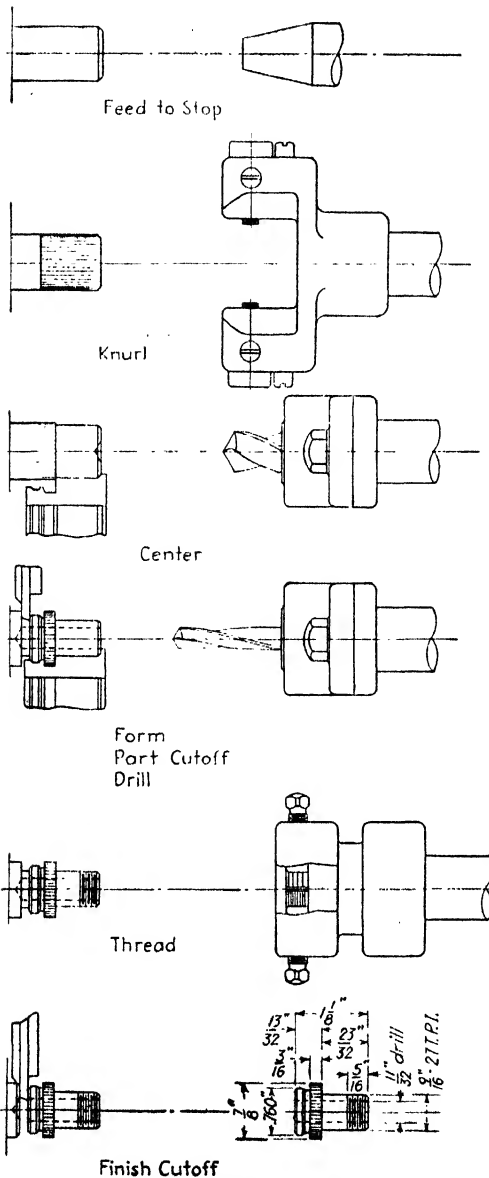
Knurled bushing (at bottom) and (above) the five successive steps and the tools required to produce it in a No. 2 single-spindle screw machine. Tools at the right, of course, are those mounted in the turret. Cross-slide tools are shown in contact with the work, at the left.
